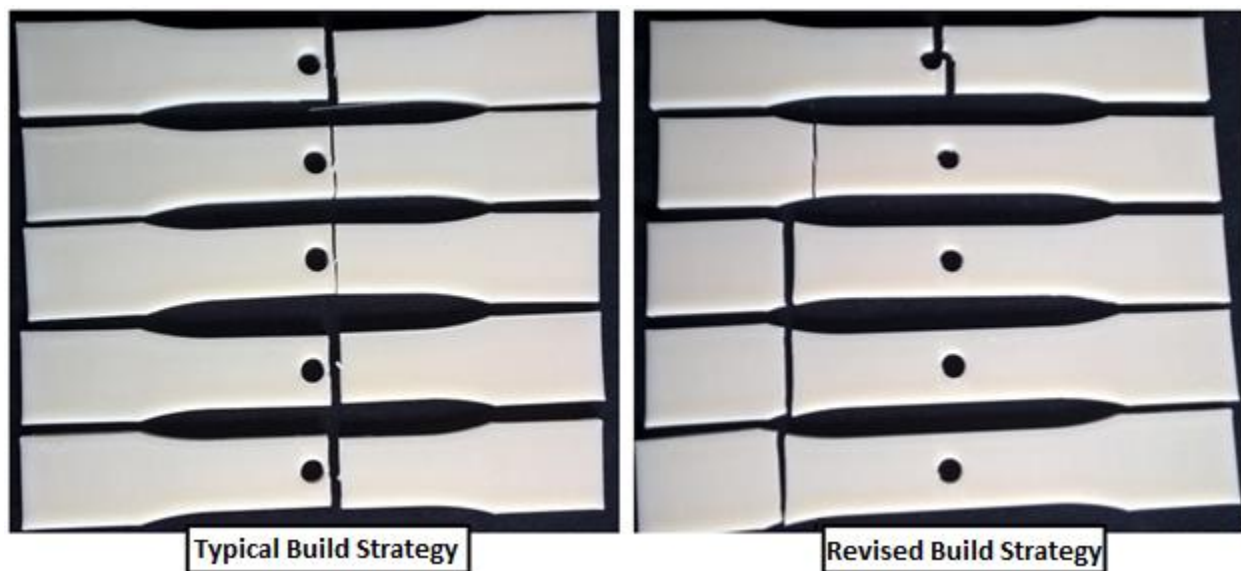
Fracture locations of the hole-in-plate specimens. Specimens built using the conventional build strategy are shown on the left. Specimens built using the revised build strategy are shown on the right.
